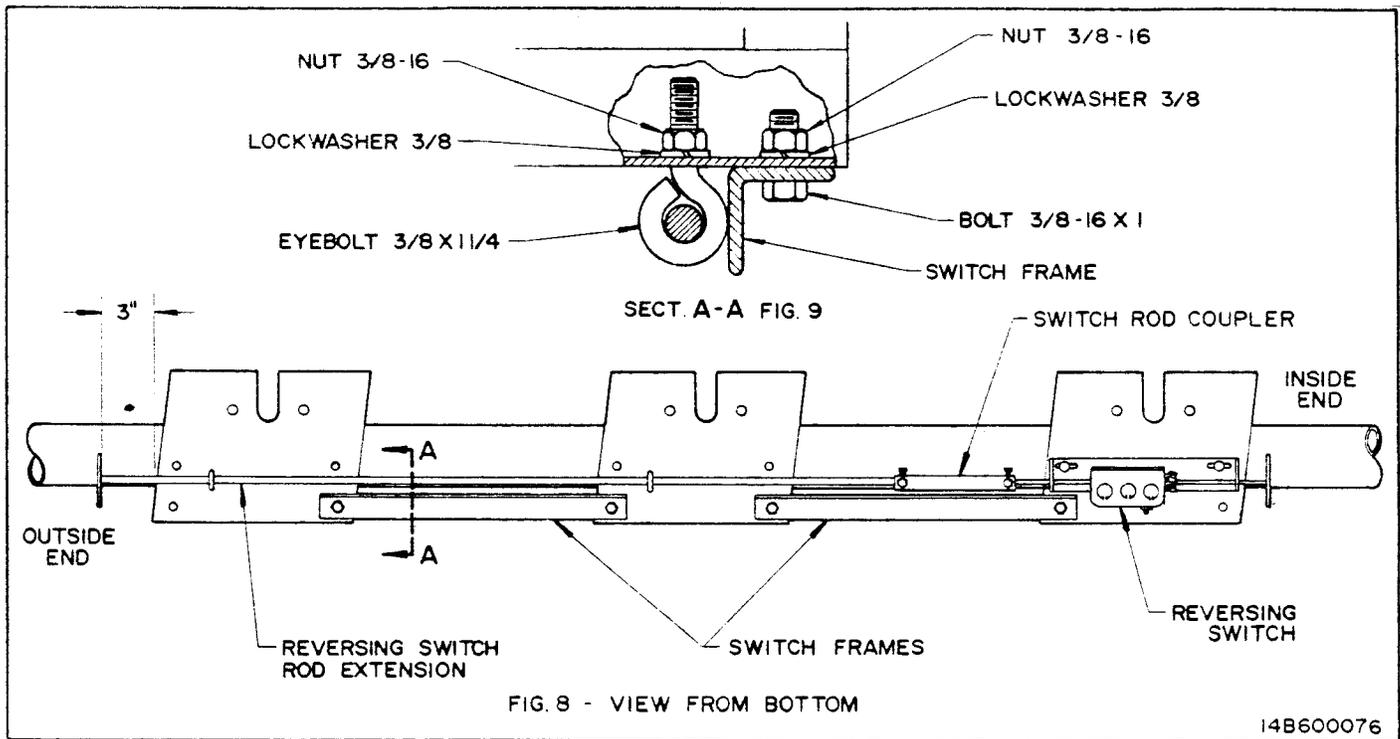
& 9 - ASSEMBLY SWITCH FRAME & REVERSING SWITCH
